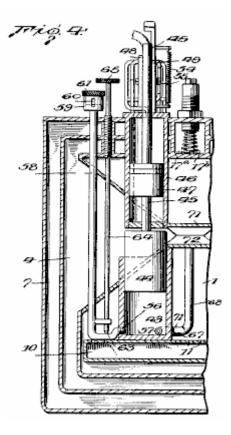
is an enlarged view through the complete double-acting pump and showing the associated distributing valve.
